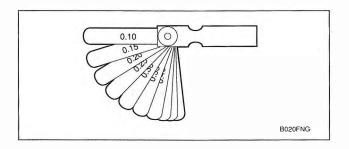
Feeler gauge set, used for precise measurement of clearances between parts.
